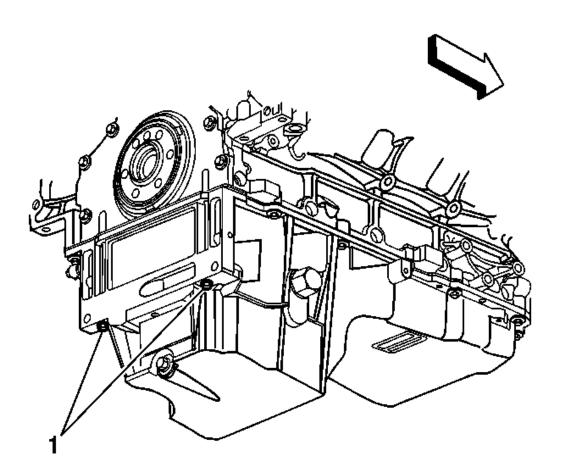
View Of Oil Pan-To-Rear Cover Bolts Courtesy of GENERAL MOTORS CORP.
